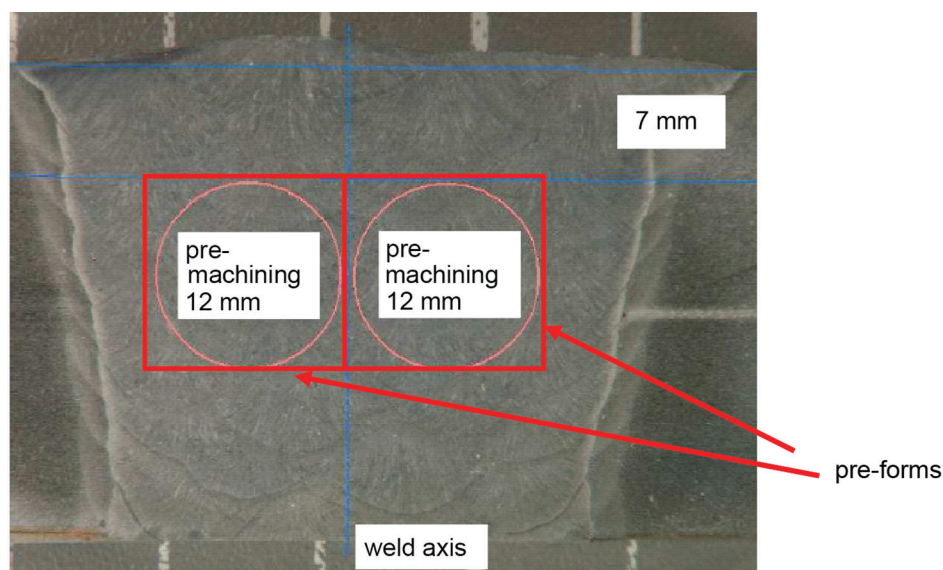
Position of Pre-forms inside the Welded Zone (Macrographic View)
